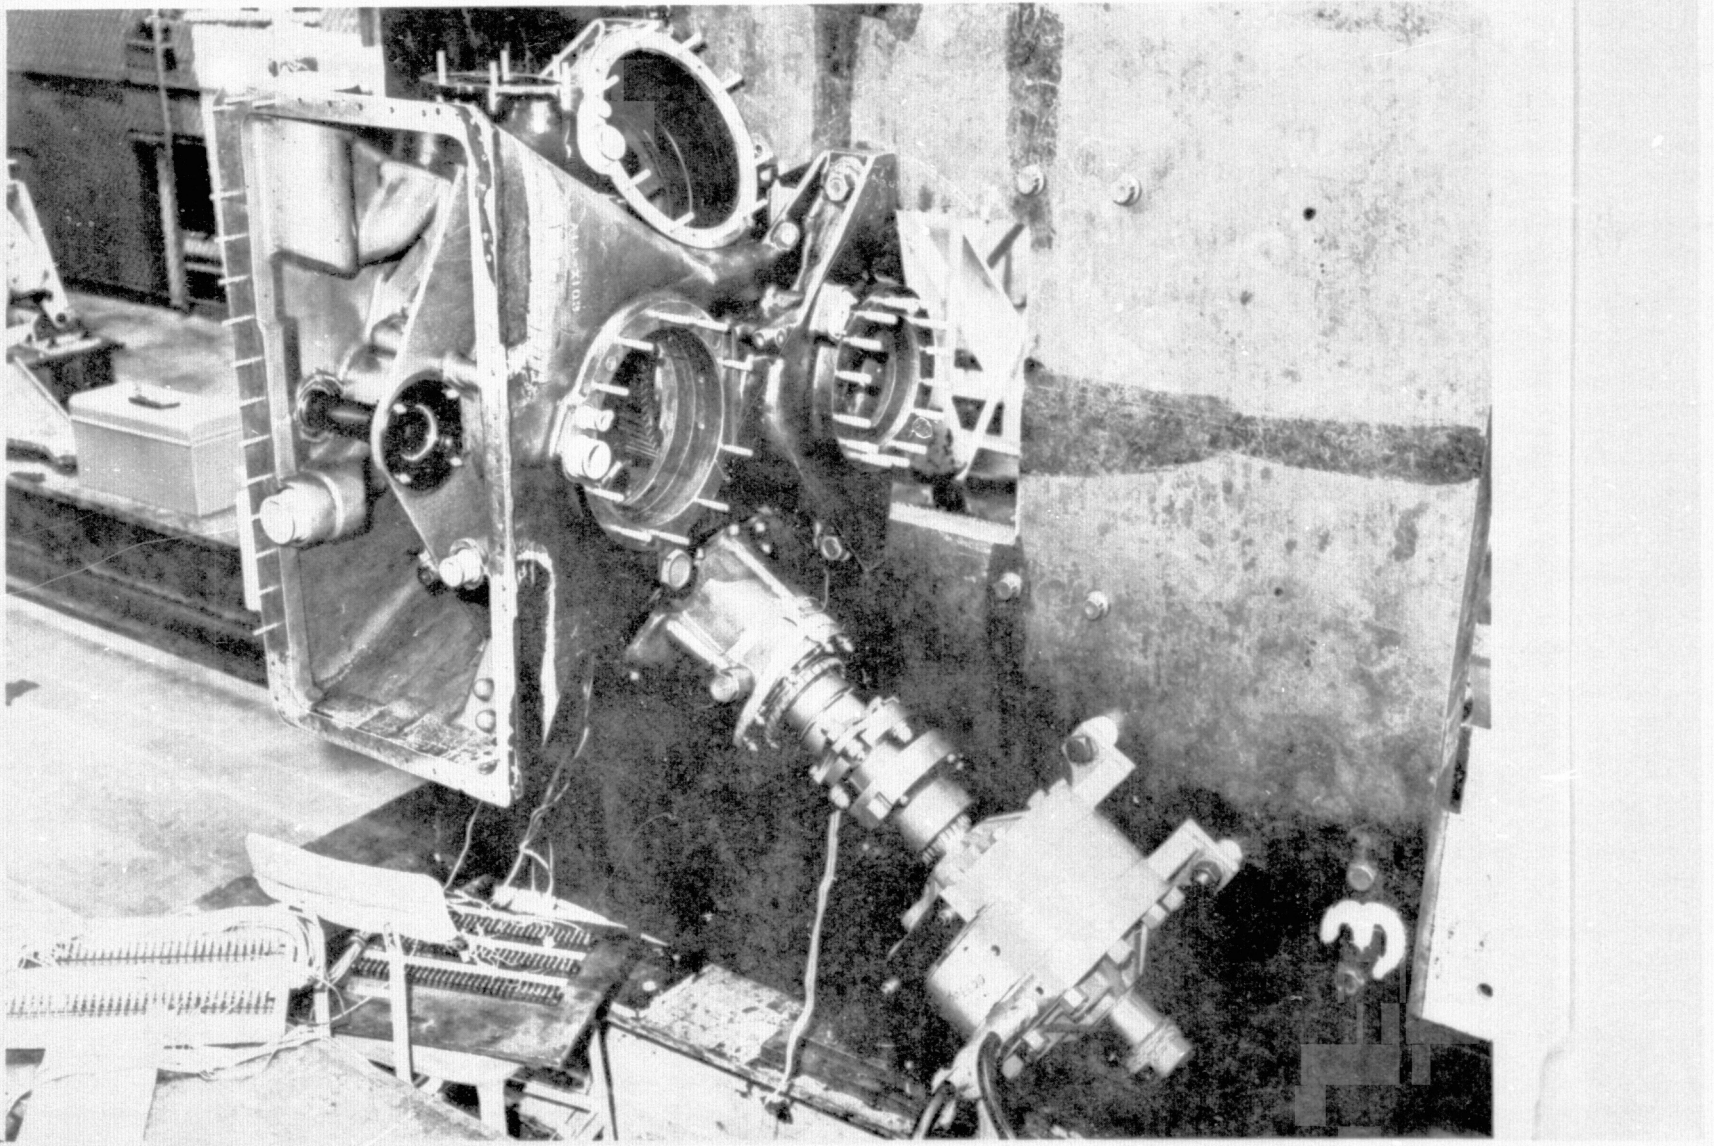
PHM BEVEL GEARING TORSIONAL FIXTURE
